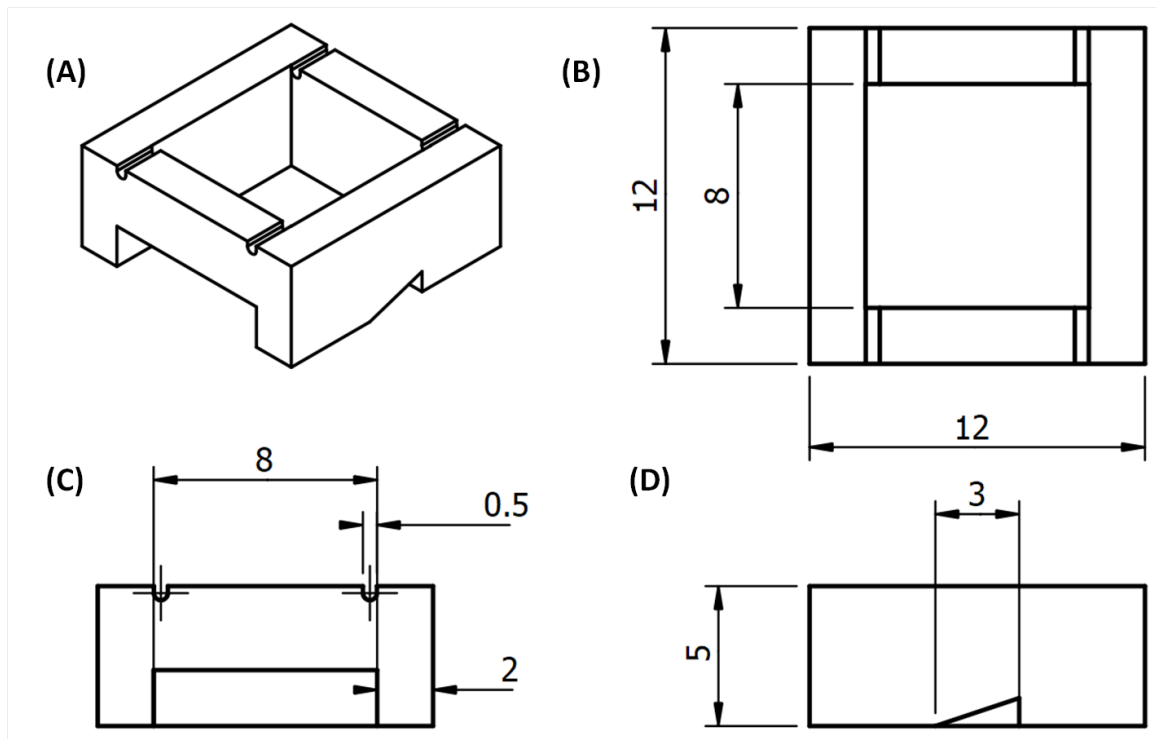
Base module box, component-f: (A) isometric view; (B) top view; (C) side view – char port; (D) side view – primary air port. (units: inches)
